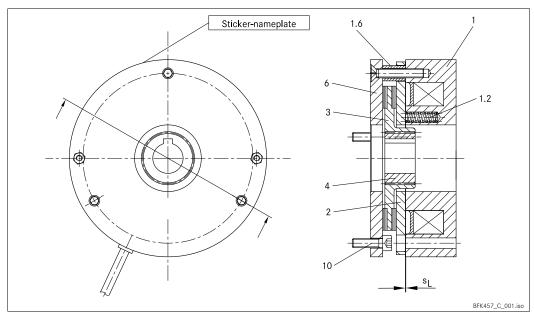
Spring-applied brake BFK457-06...16 Compact, completely mounted with rotor and flange
